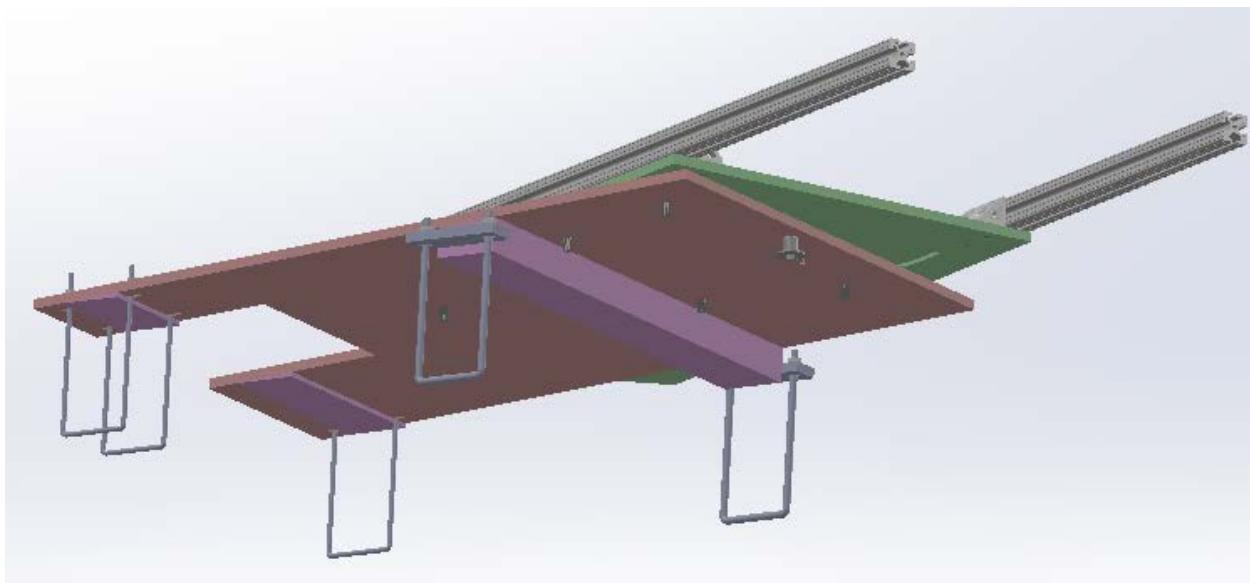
Lidar mount assembly from front bottom showing the wedge (magenta), bottom plate (salmon), top lidar plate (green) and mounting rails and u-bolts.
